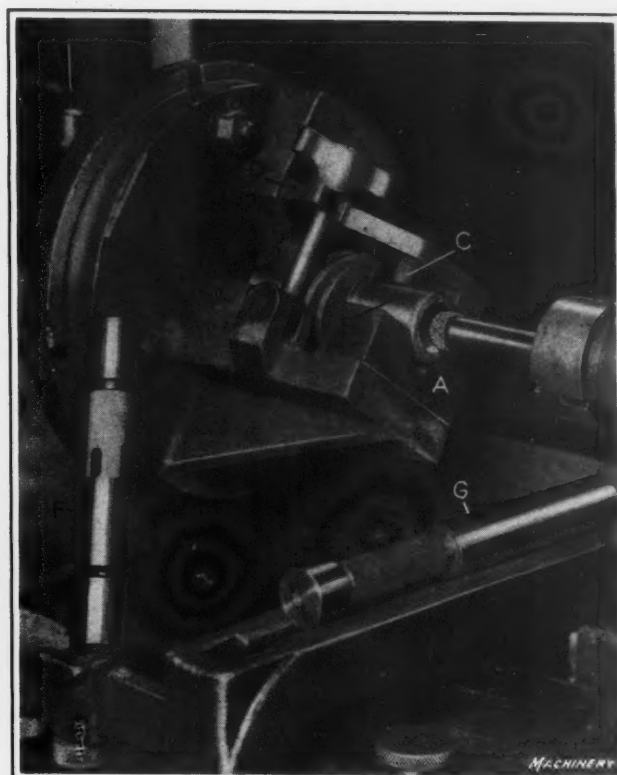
Internal Grinding Machine equipped for grinding Bore of Steering Worms
